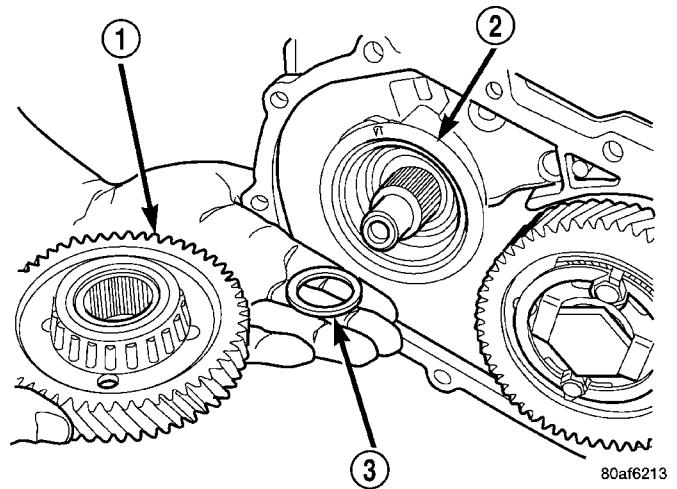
Install Transfer Shaft Gear and (Select) Shim
